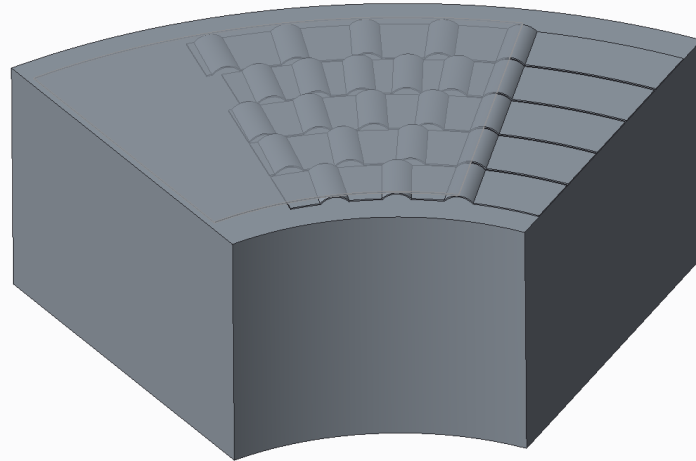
Schematic of a single pad bump-type foil thrust bearing pad with geometry as displayed in Table C1.
